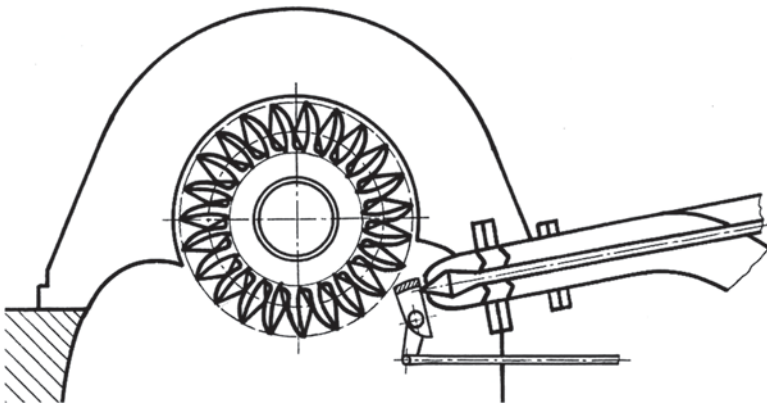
Pelton turbine with horizontal shaft and one injector
